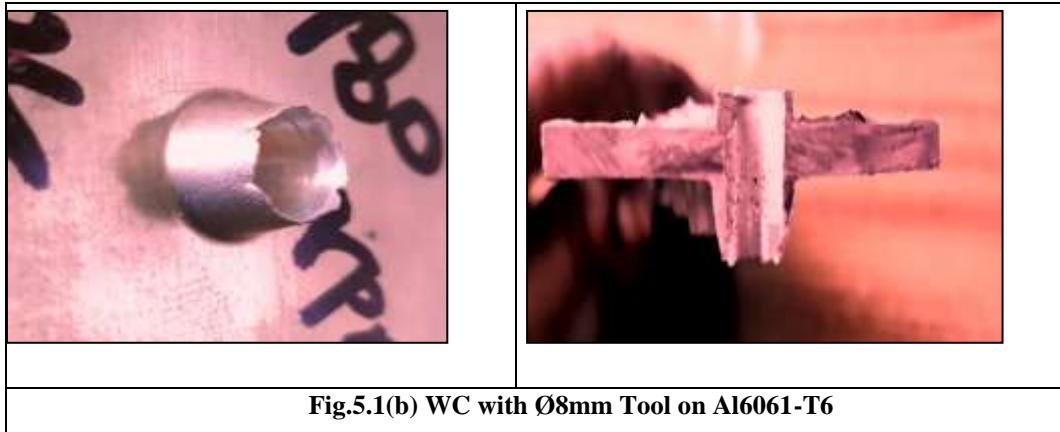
(b) WC with Ø8mm Tool on Al6061-T6
